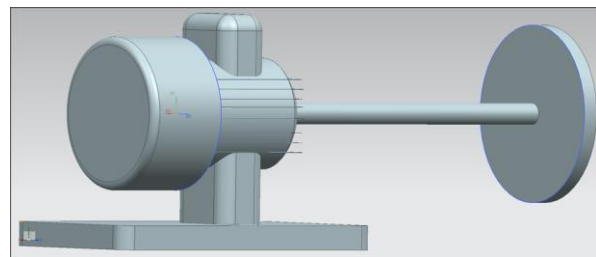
The assembly motor-shaft-flywheel: right motor-shaft-side – back view.
